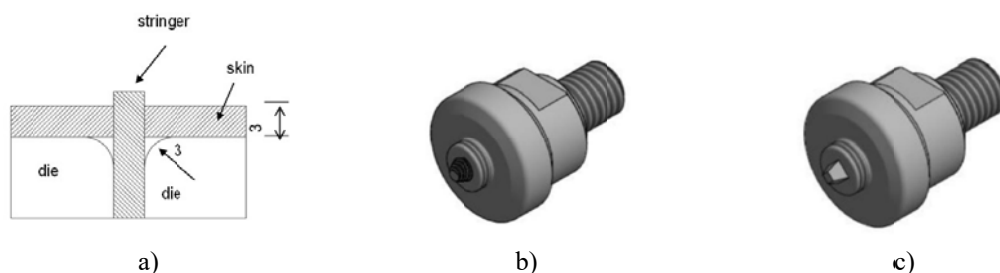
a) T-butt joint preparation; b) tool with conical threaded pin (CRP); c) tool with pyramidal progressive pin (PP).
